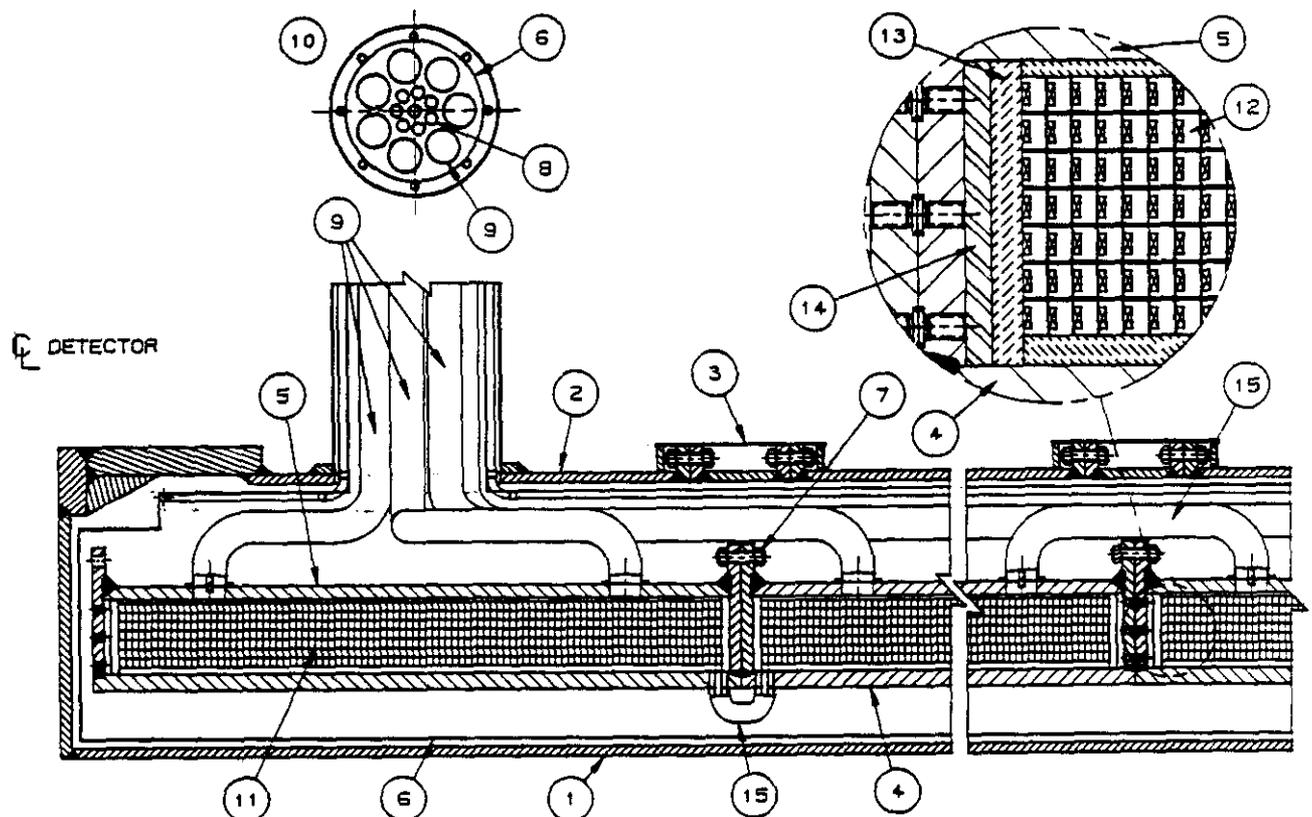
Axial cross section of coil, helium and vacuum vessels: 1, inner and 2, outer, vacuum shells; 3, assembly joint (if required); 4, inner and 5, outer helium vessel shell; 6, radiation shield; 7, coil module attachment; 8, liquid helium supply pipe; 9, helium return/vent pipe; 10, chimney to storage dewar; 11, coil winding; 12, conductor; 13, G-10 insulation; 14, axial preload bar; 15, electrical interconnect pipe.
